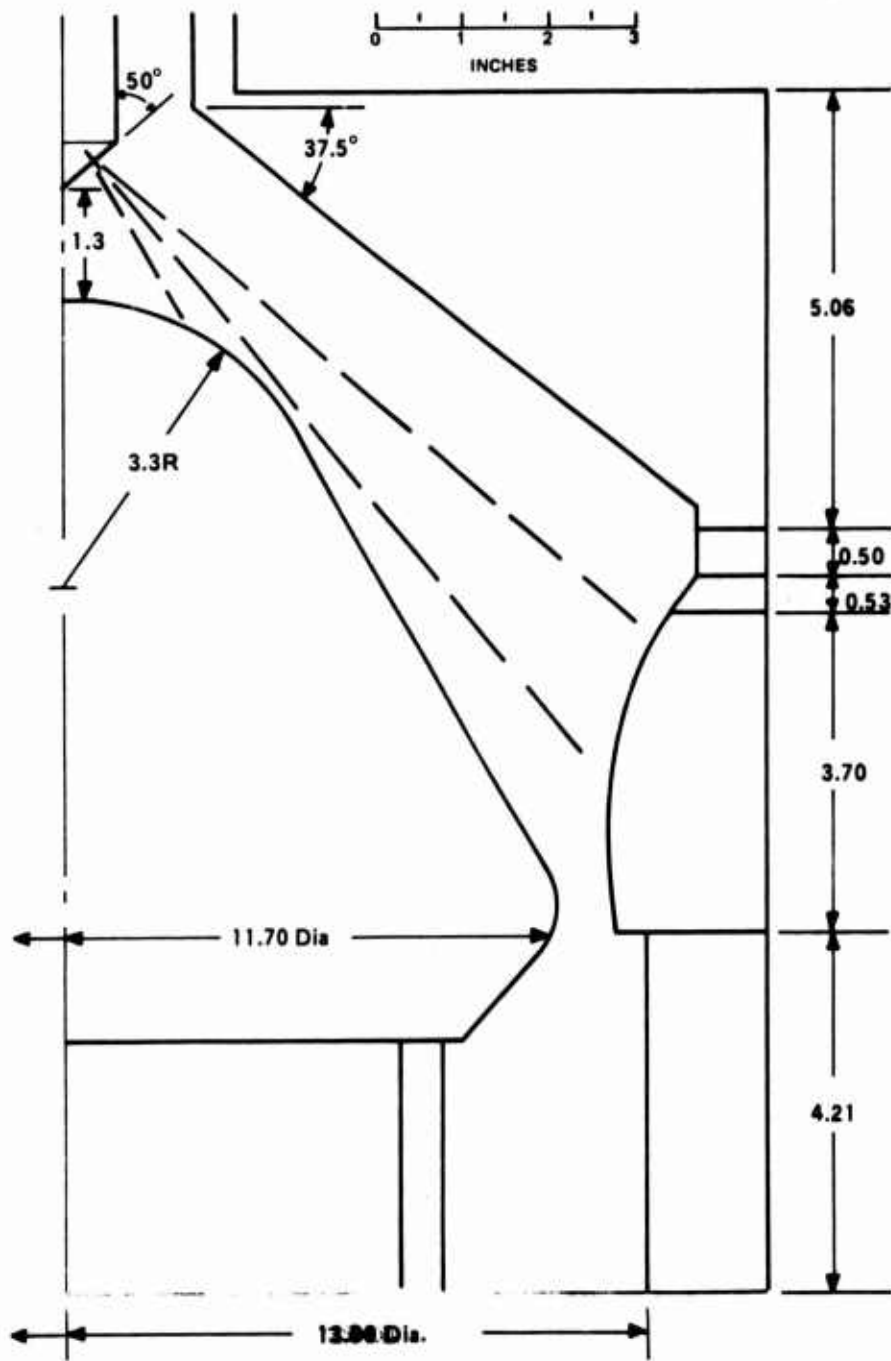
Deposition Chamber Geometry of Run No. 8300-22.
